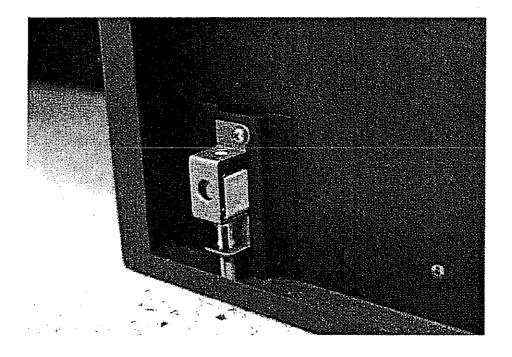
Front Panel Spring Catch (1 per Corner)
